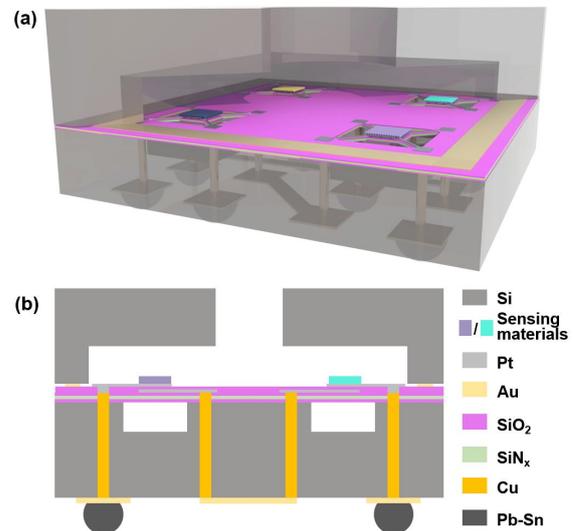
The schematic structure of the wafer level packaging and TSV based multimode sensor chip: (a) 3D structure; (b) 2-dimensional cross-sectional structure.
